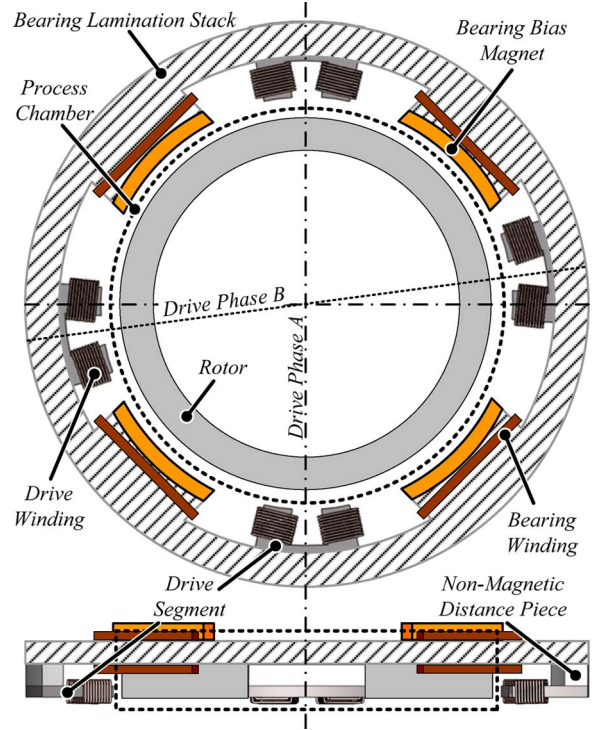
Schematic top view and side view of the prototype system showing the circumferential separation of the drive and bearing unit.
